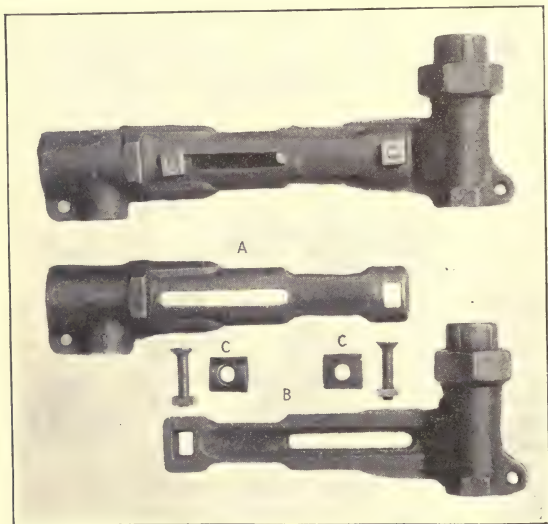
Adjustable Tie-in Connections, page 465: A, Inlet Member; B, Outlet Member; C, Rocker Plates.
